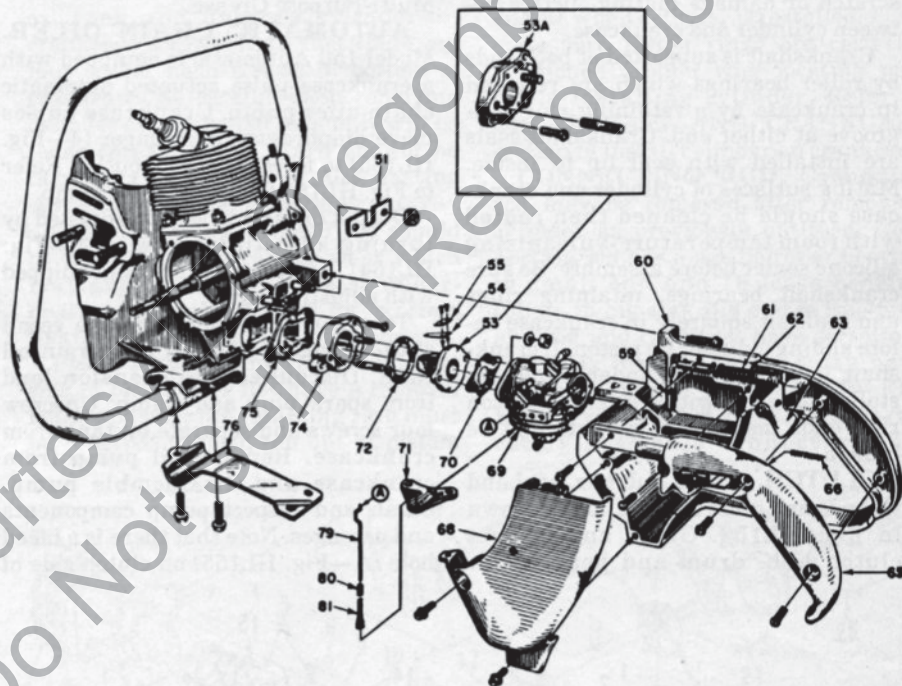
Exploded view showing throttle controls and carburetor mounting typical of WIZ series and models Super 77 and 775G. On models WIZ 55 and Super WIZ 55, throttle opening rod (79) and spring (81) are used instead of throttle opening spring on carburetor throttle shaft. Throttle rod (61) releases carburetor throttle arm when trigger (63) is actuated, then throttle opening spring (non-governed models) or governor opens carburetor throttle. Flat reed seat (53A) used on some models is shown in inset. Refer to Fig. HL203 or Fig. HL204 for fuel pick-up installation in tank and carburetor air inlet connections.
